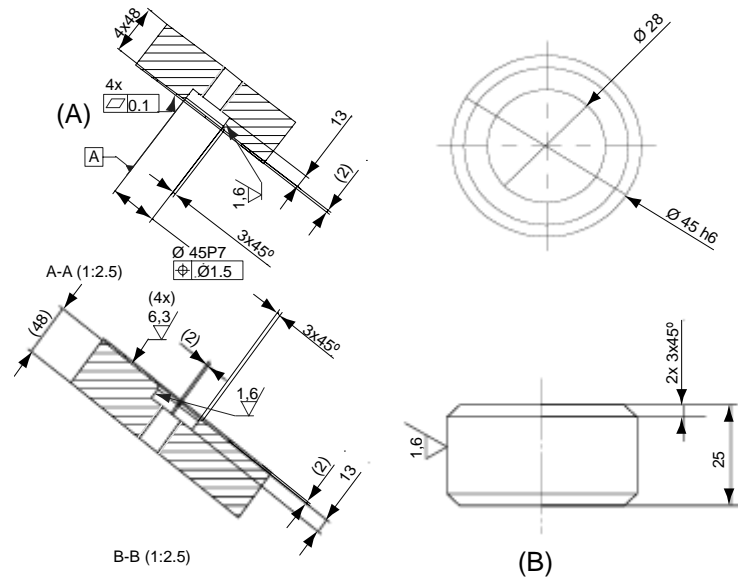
Sections of base plate and guide sleeve (dimensions in mm).
